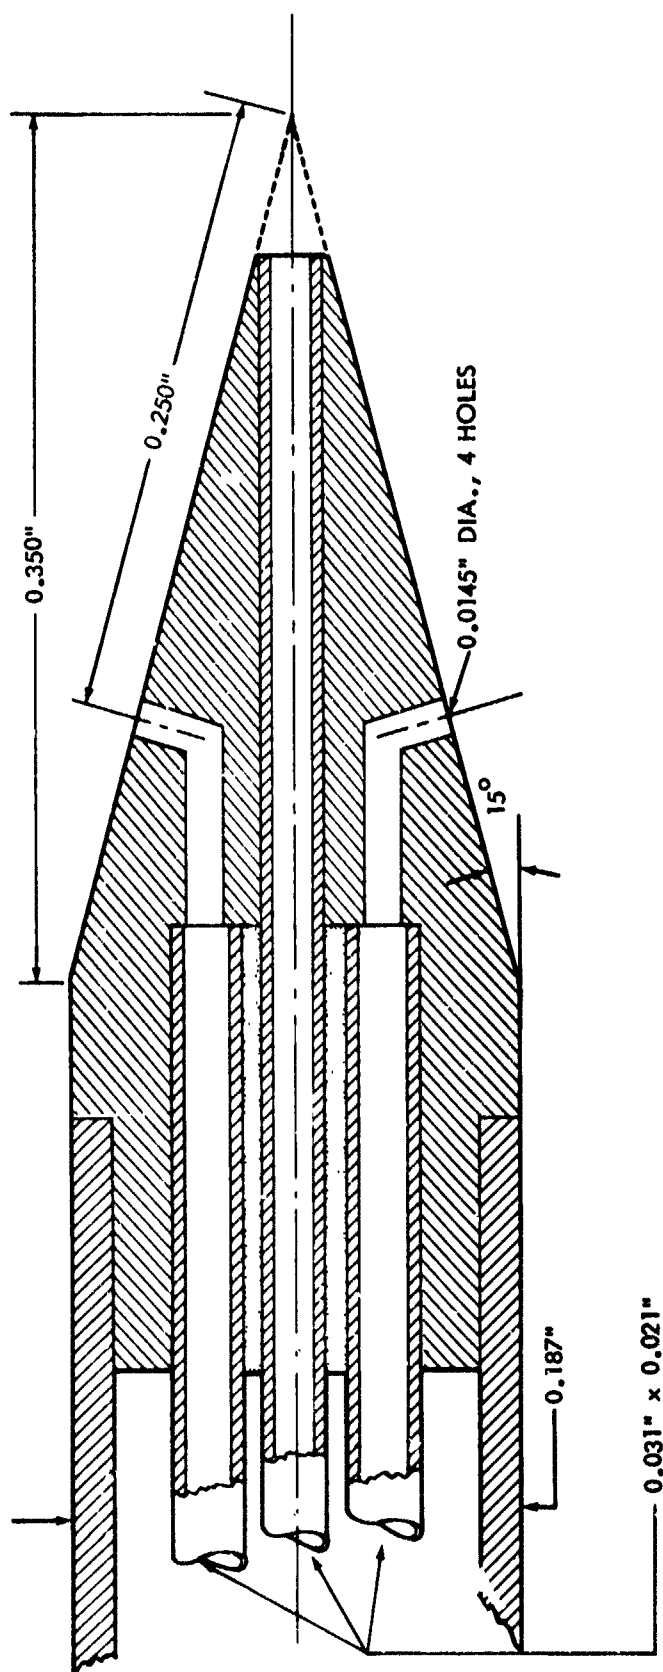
TYPICAL CONE PROBE DIMENSIONS
